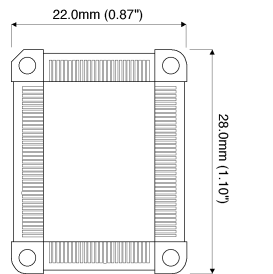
128 pin QFP Socket Adapter Dimensions for HP E3471C (HP P/N E3471-61621)
